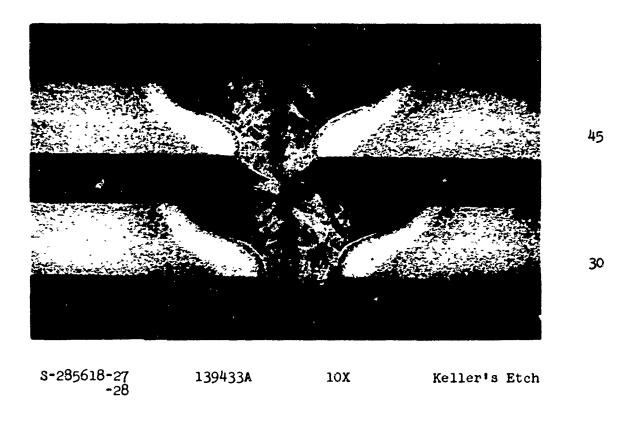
Shows the change in bead shape of DCRP-GMA welds in .090-in. 2014-T6 sheet made with decreasing gas flow
